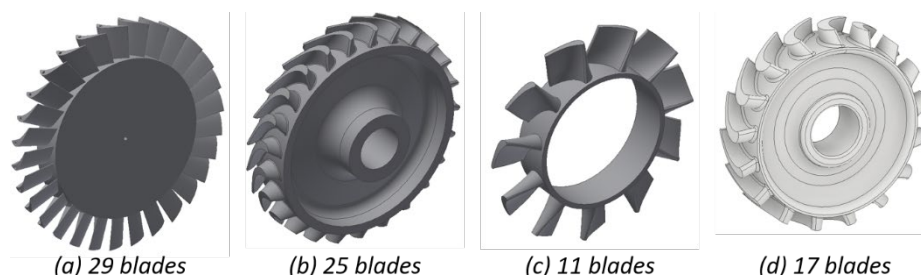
Design improvement of the turbine wheel; a) initial design with 29 blades; b) 25 blades; c) 11 blades and smaller hub radii; d) improved design with 17 blades
